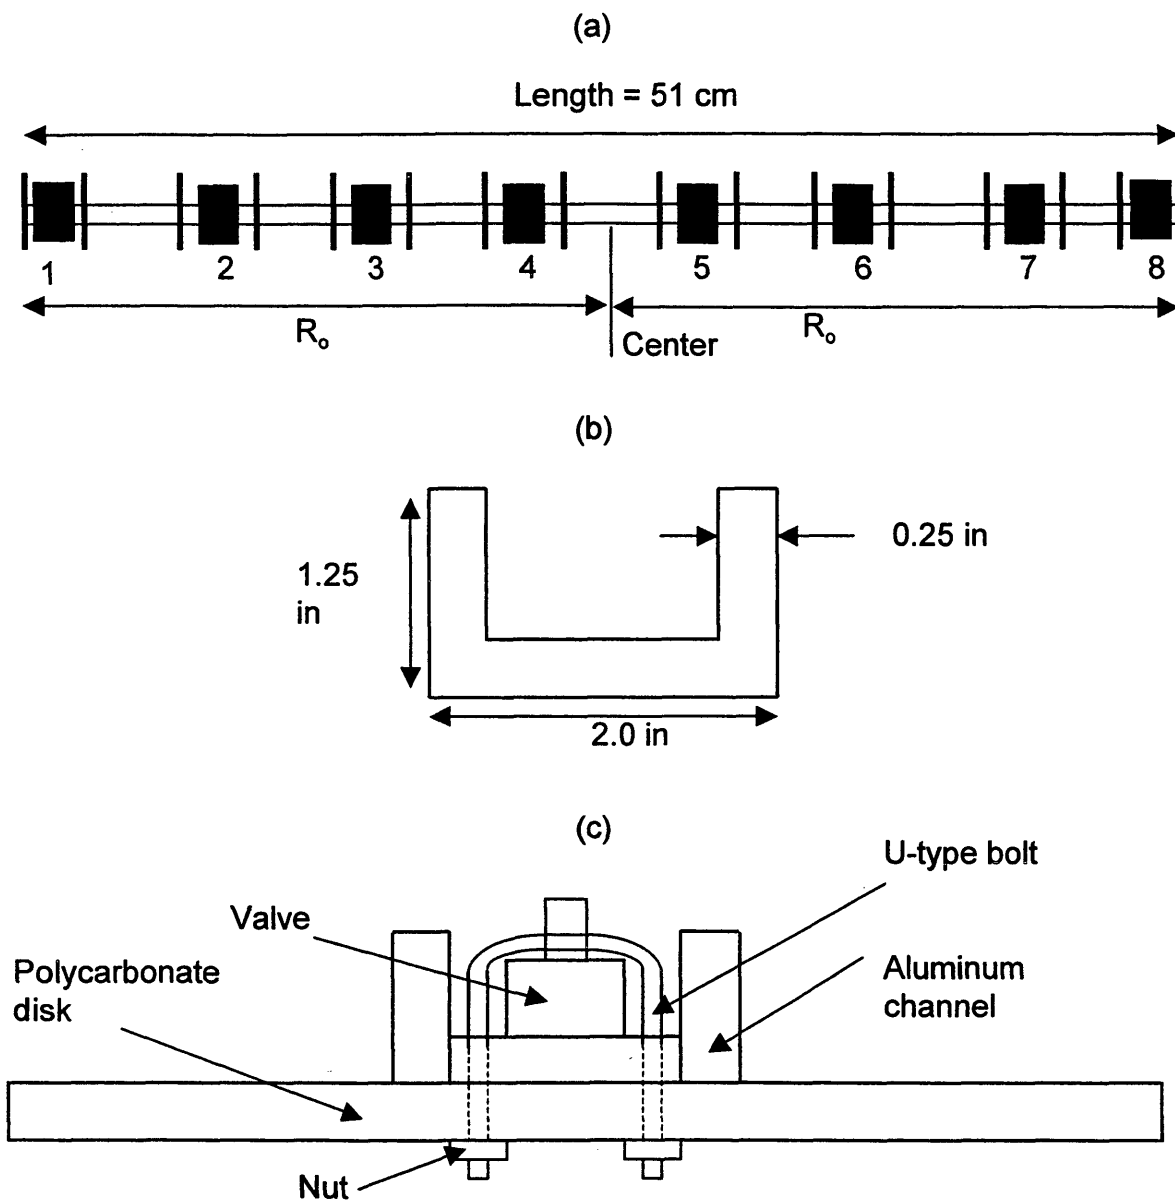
Mechanical supports including (a). front view of the PCA and (b). side view of the aluminum channel, (C). side view of the PCA sitting inside the aluminum channel and fixed on the polycarbonate disk
